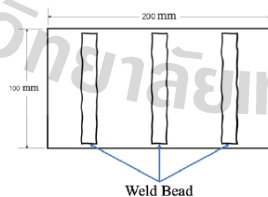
Schematic drawing of the Bead on Plate (BOP) welds
